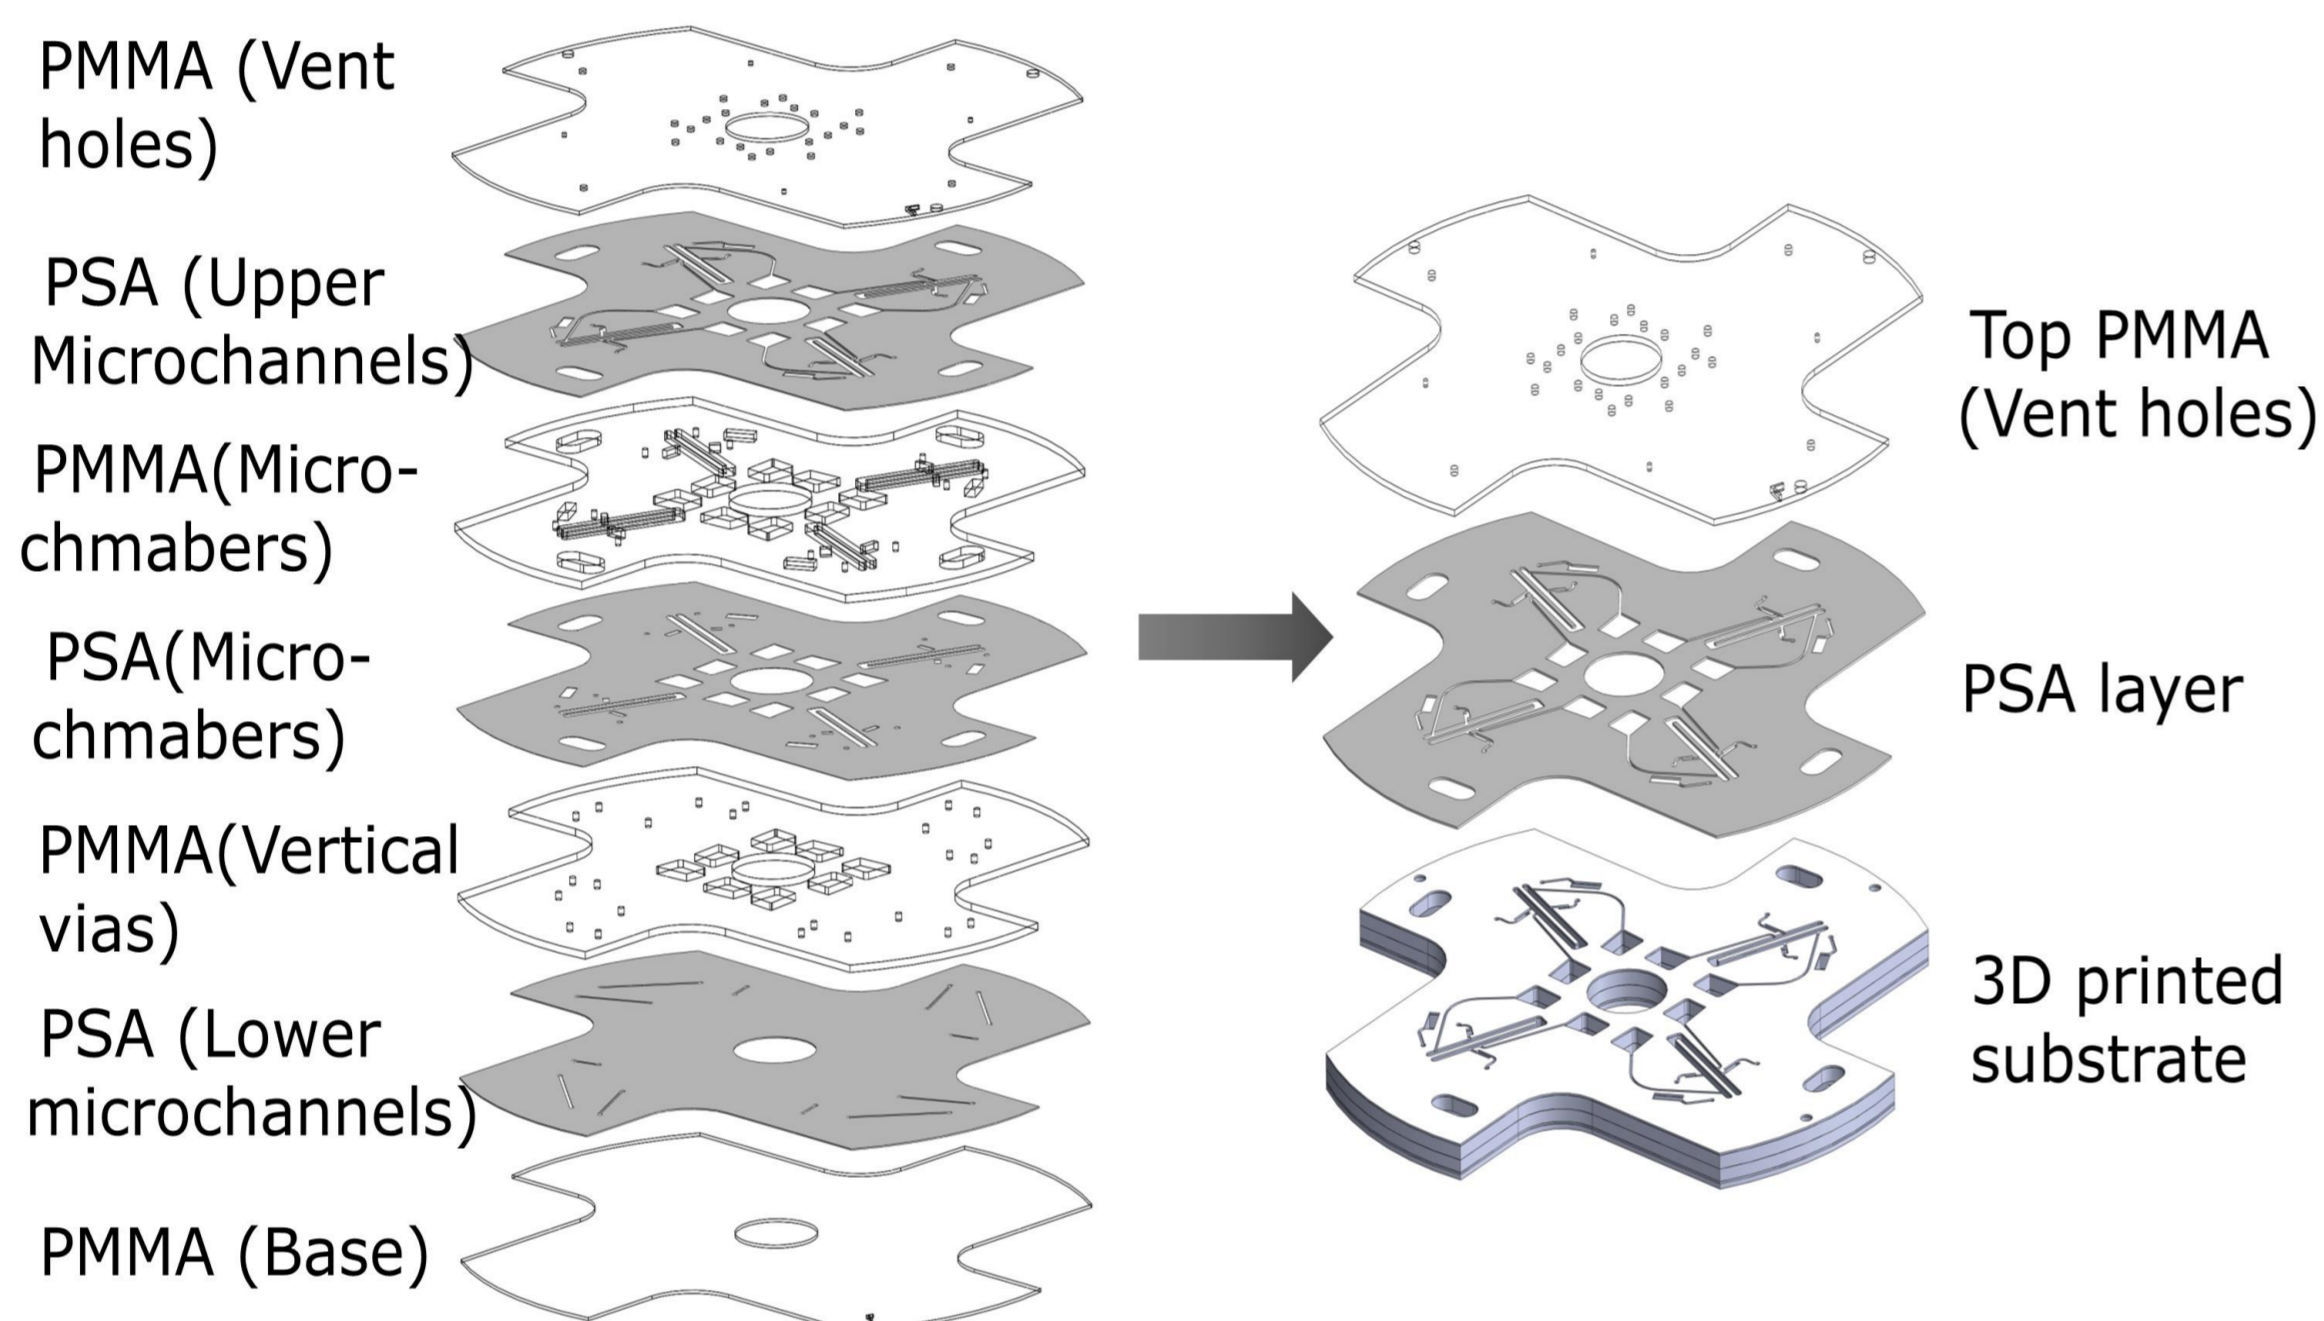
The left panel is the exploded view of the disc fabricated by traditional approach. The right panel represents the exploded view of the disc fabricated by 3D printing approach.
